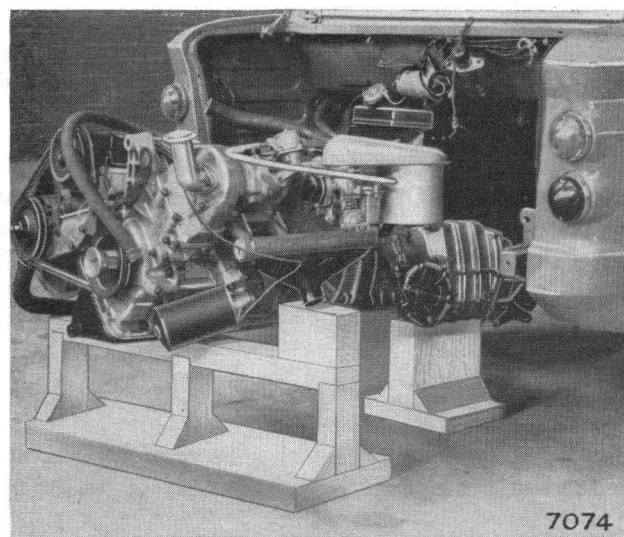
Engine and transaxle removed from vehicle by pushing vehicle forward
